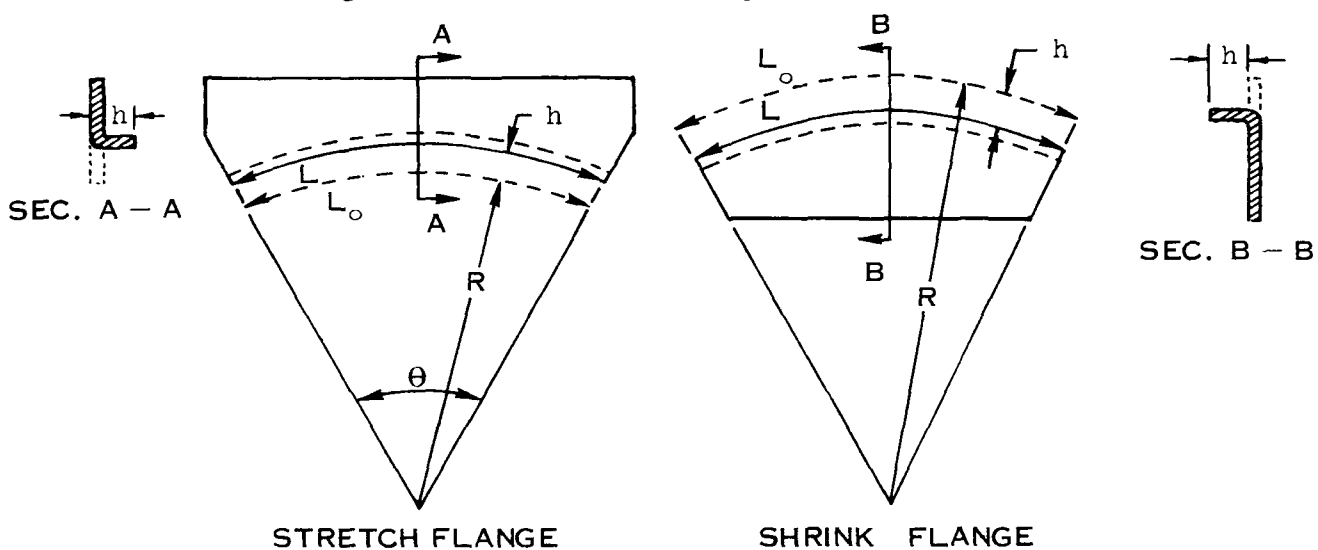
STRETCH AND SHRINK FLANGE PARTS
